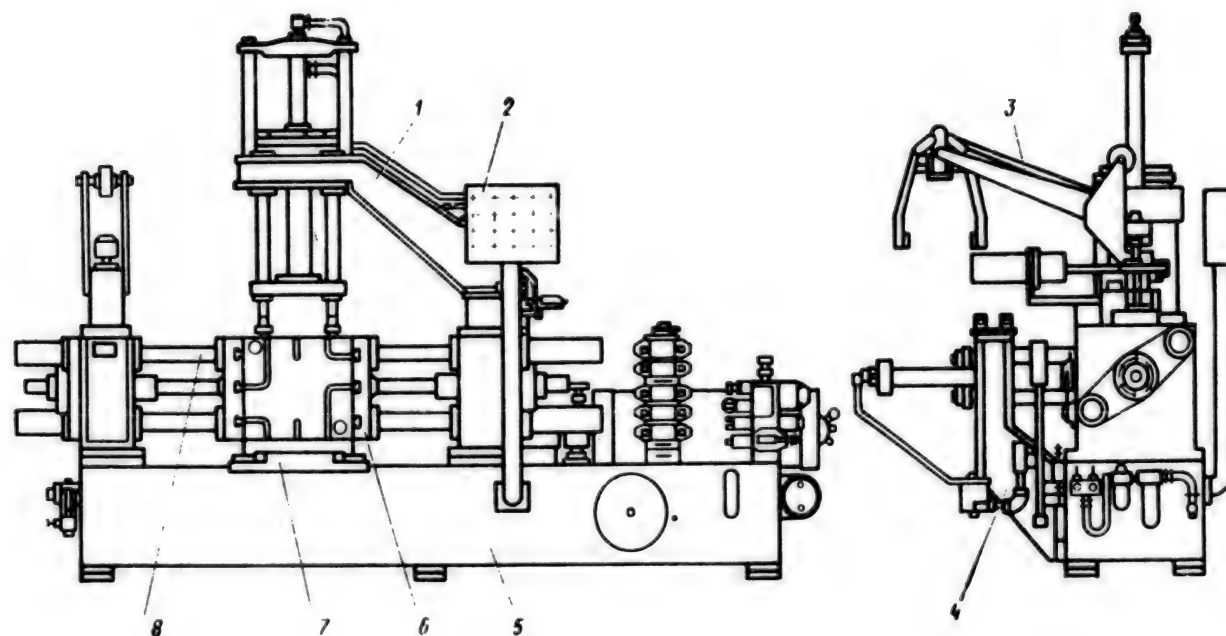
82A503 Mechanized Iron Mold Machine
